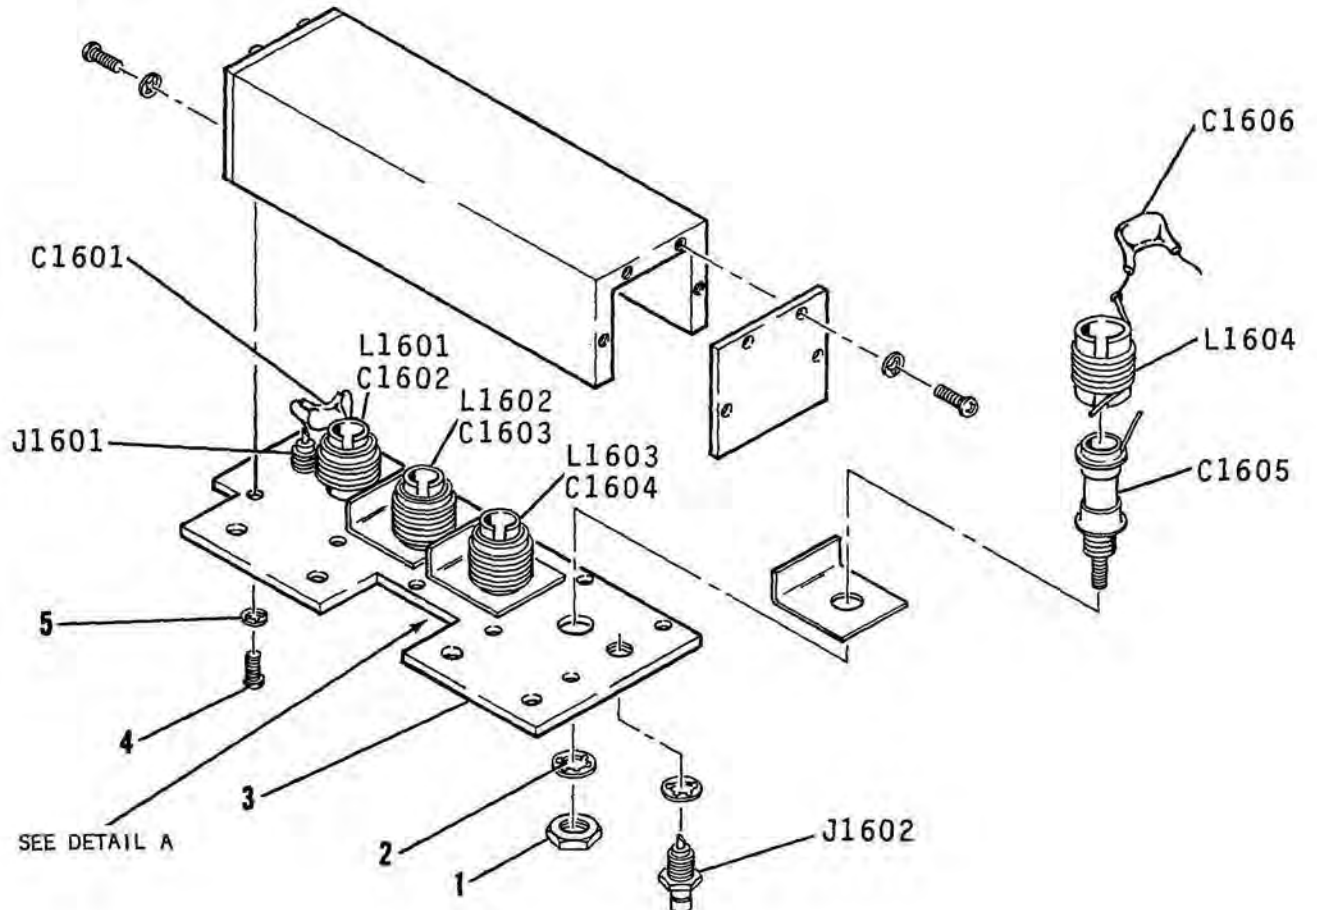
108 MHz Bandpass Filter Assembly (1600)
